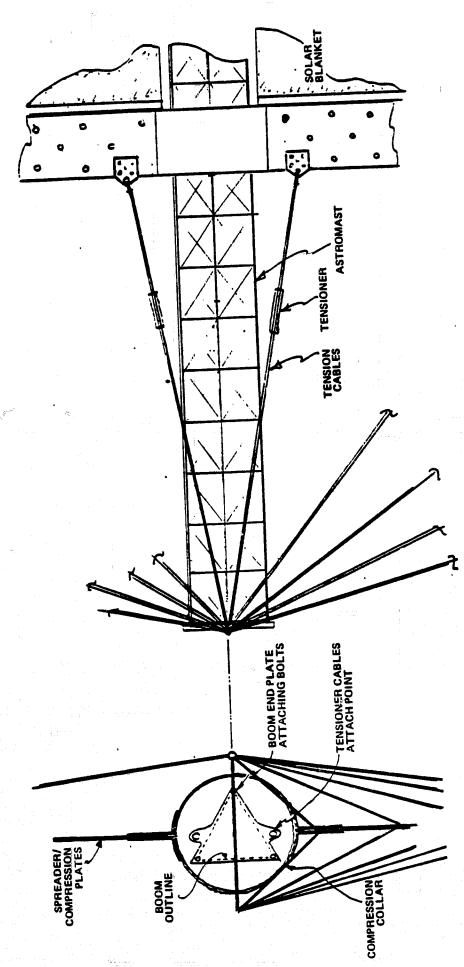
COMPRESSION PLATE AND TENSION PLATE DETAILS
